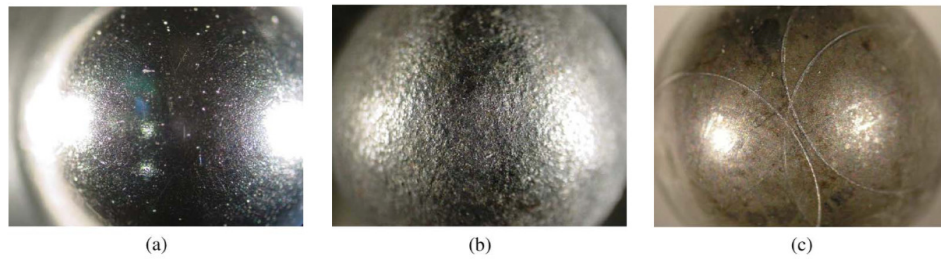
The surface of a bearing ball (a) healthy surface (b) etched ball surface (c) grooved ball surface [10]
